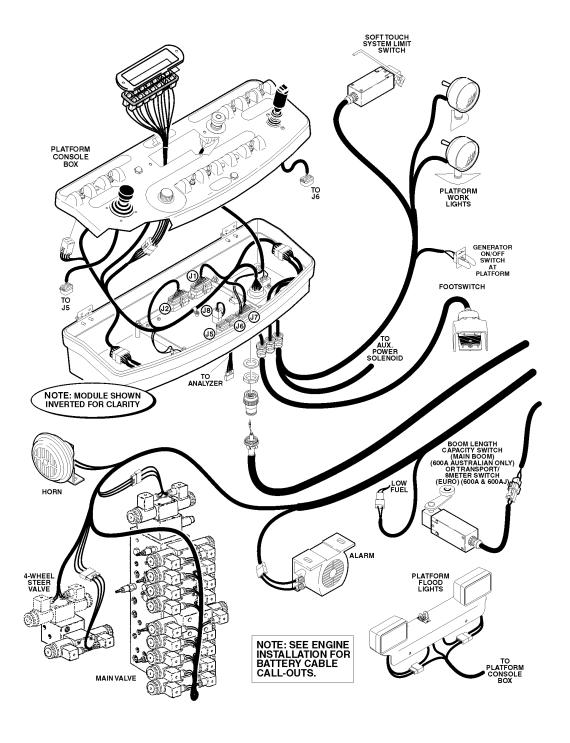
Electrical Harness - S/N 80000 to 87000 - Sheet 1 of 2
